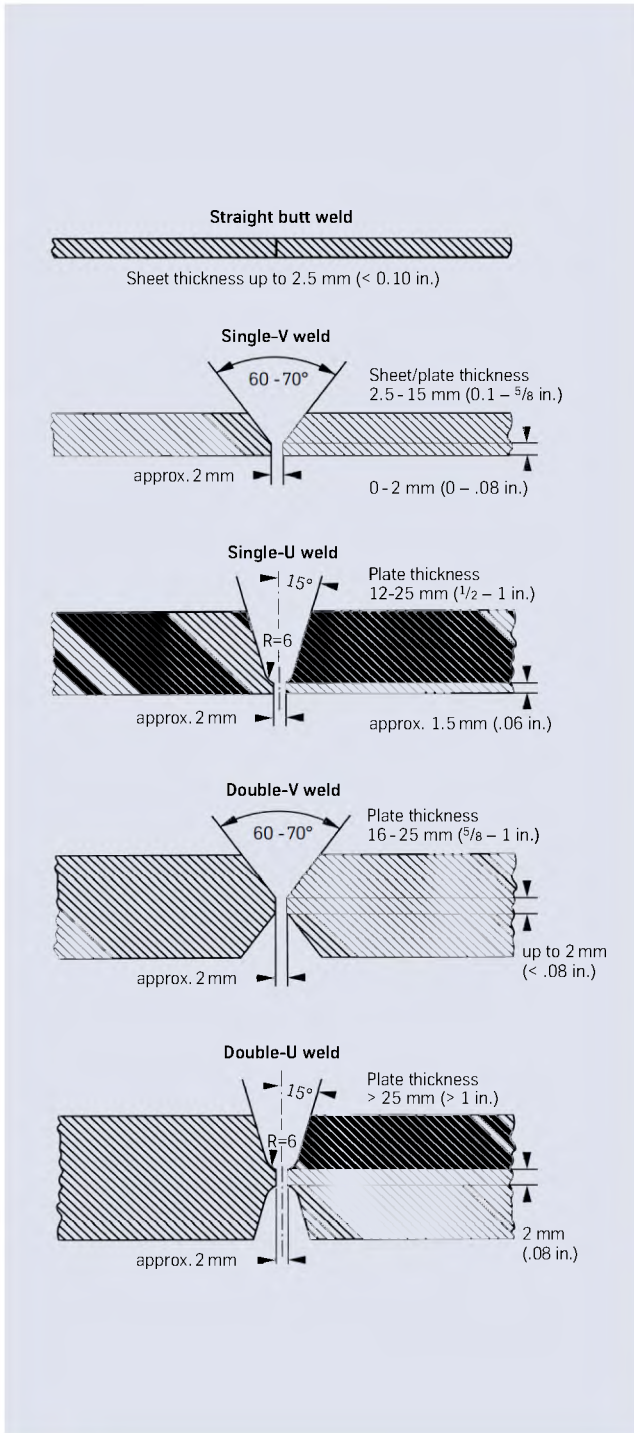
Edge preparation for welding of nickel alloys and special stainless steels.
